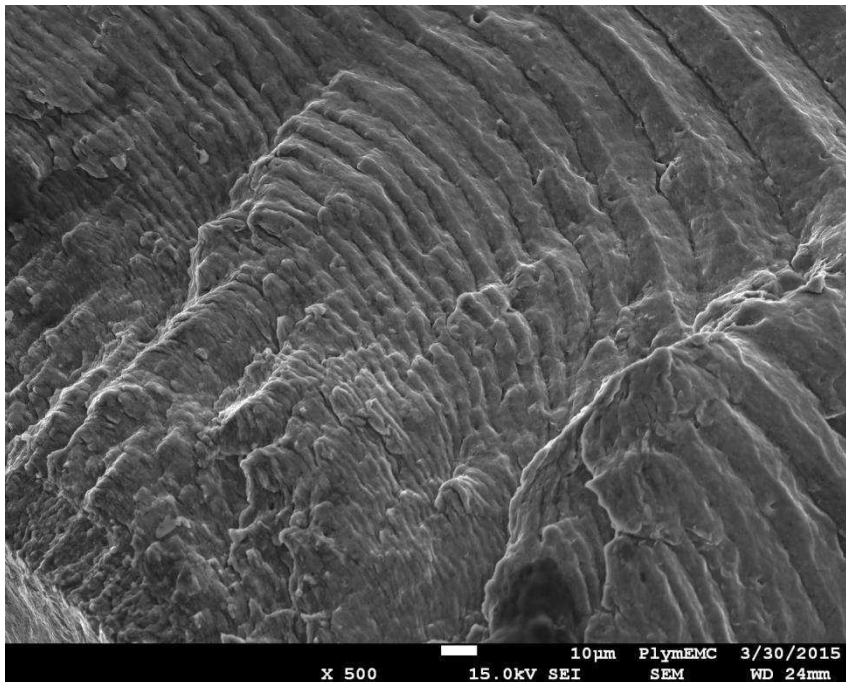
A smaller secondary site of fatigue crack initiation is present at the inner edge of tube specimen IPh2 in the lower left corner of this image.
